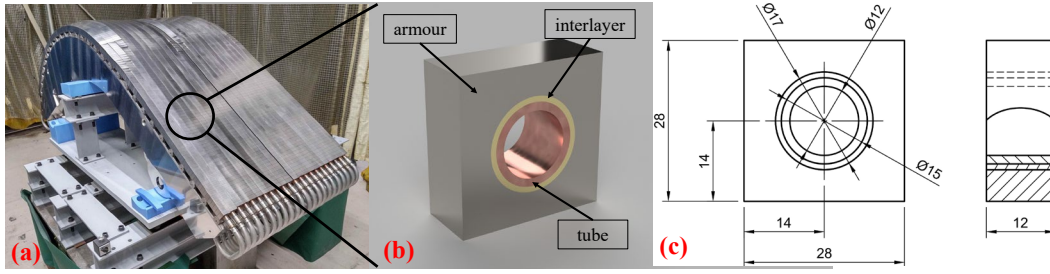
(a) Divertor of ITER. (b) Single block of OVTs on the divertor inner surface. (c) Technical drawing of single OVT for ITER (Unit: mm).
